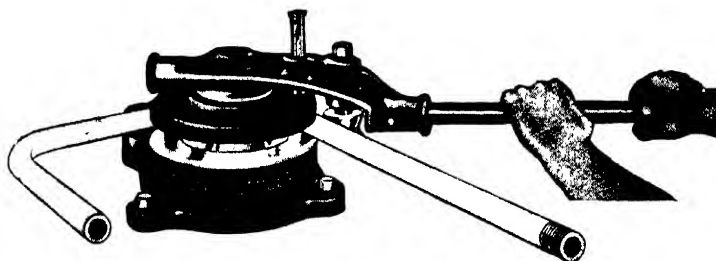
BENDING A 1-IN. STEAM PIPE USING A UNIVERSAL BENDER
